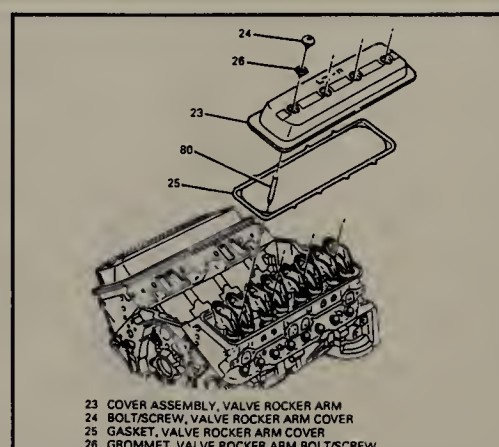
Exploded view of the rocker arm (valve) cover and related components
